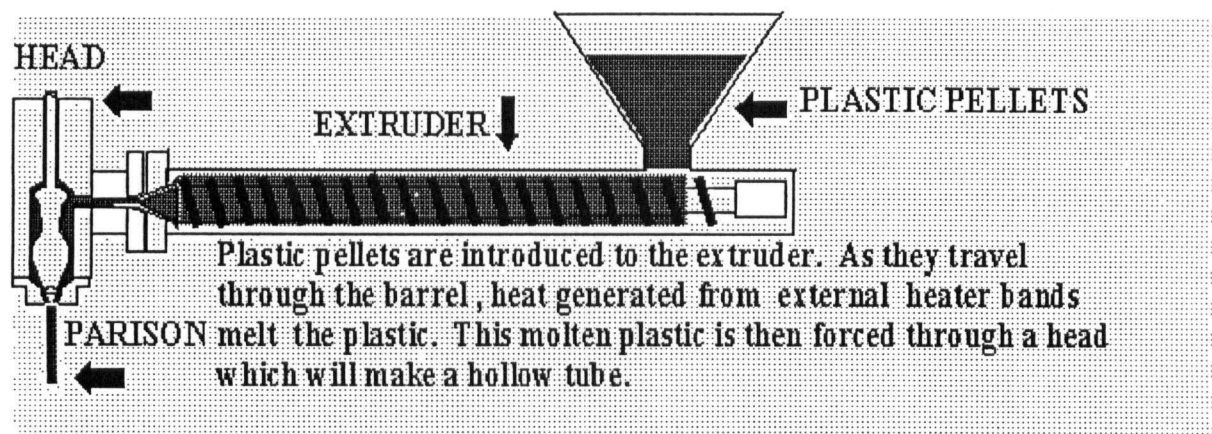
A schematic diagram of an extrusion blow moulding machine.
